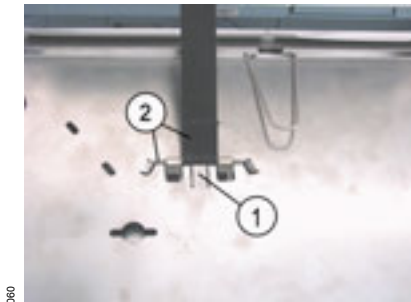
Detail view of operator control unit: Metal pin and retaining strap
